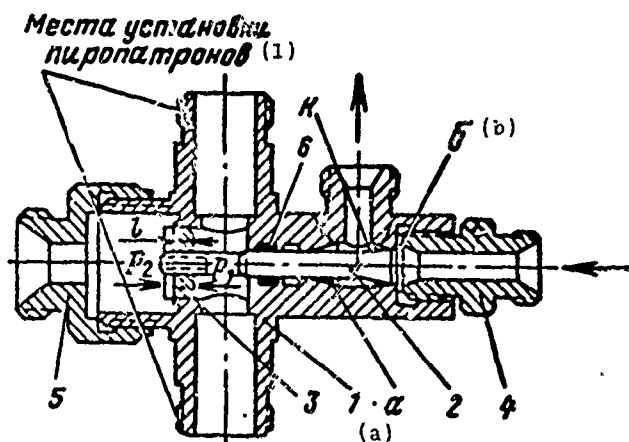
A normally closed direct-action explosive valve with vent of solid-reactant gases: 1 - housing; 2 - valve; 3 - piston; 4 - connector tube; 5 - connector tube for venting of solid-reactant gases; 6 - rubber ring; a - bore hole; b - valve bead; K - valve cone.
